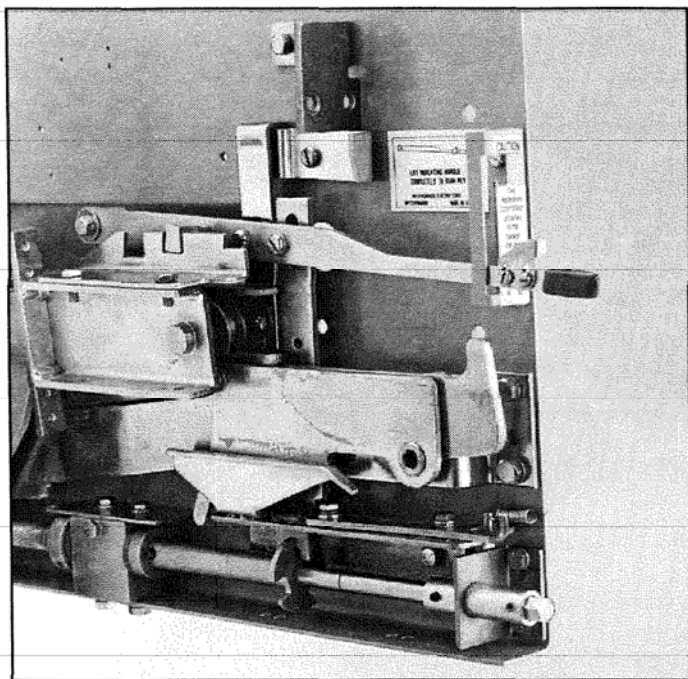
Indexing Bracket Shown in "TEST" Position (Breaker Removed for Clarity)
